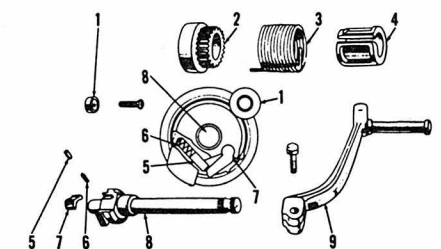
Kick starter assembly should be installed as shown in the cross sectional drawing.
